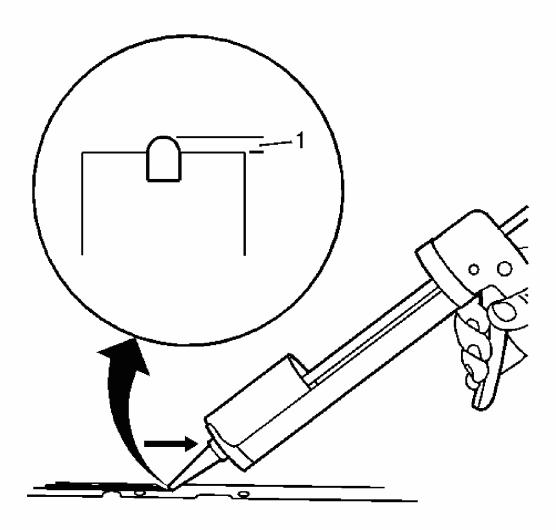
Applying RTV Sealant Courtesy of GENERAL MOTORS CORP.
